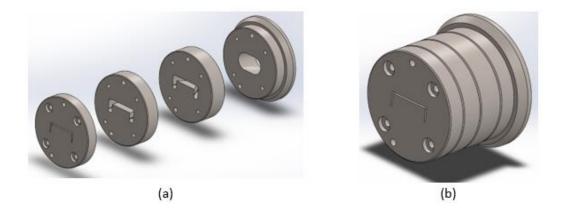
Extrusion die assembly; (a) Exploded view; (b) Assembled view.
